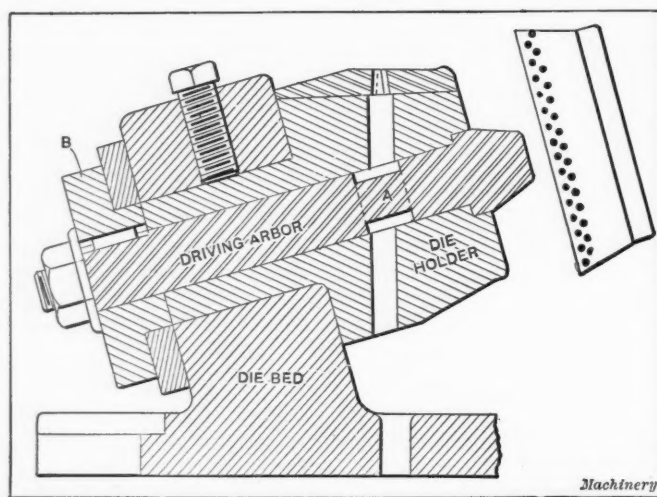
Die, Die Bed and Holder for a Tapered Shell
